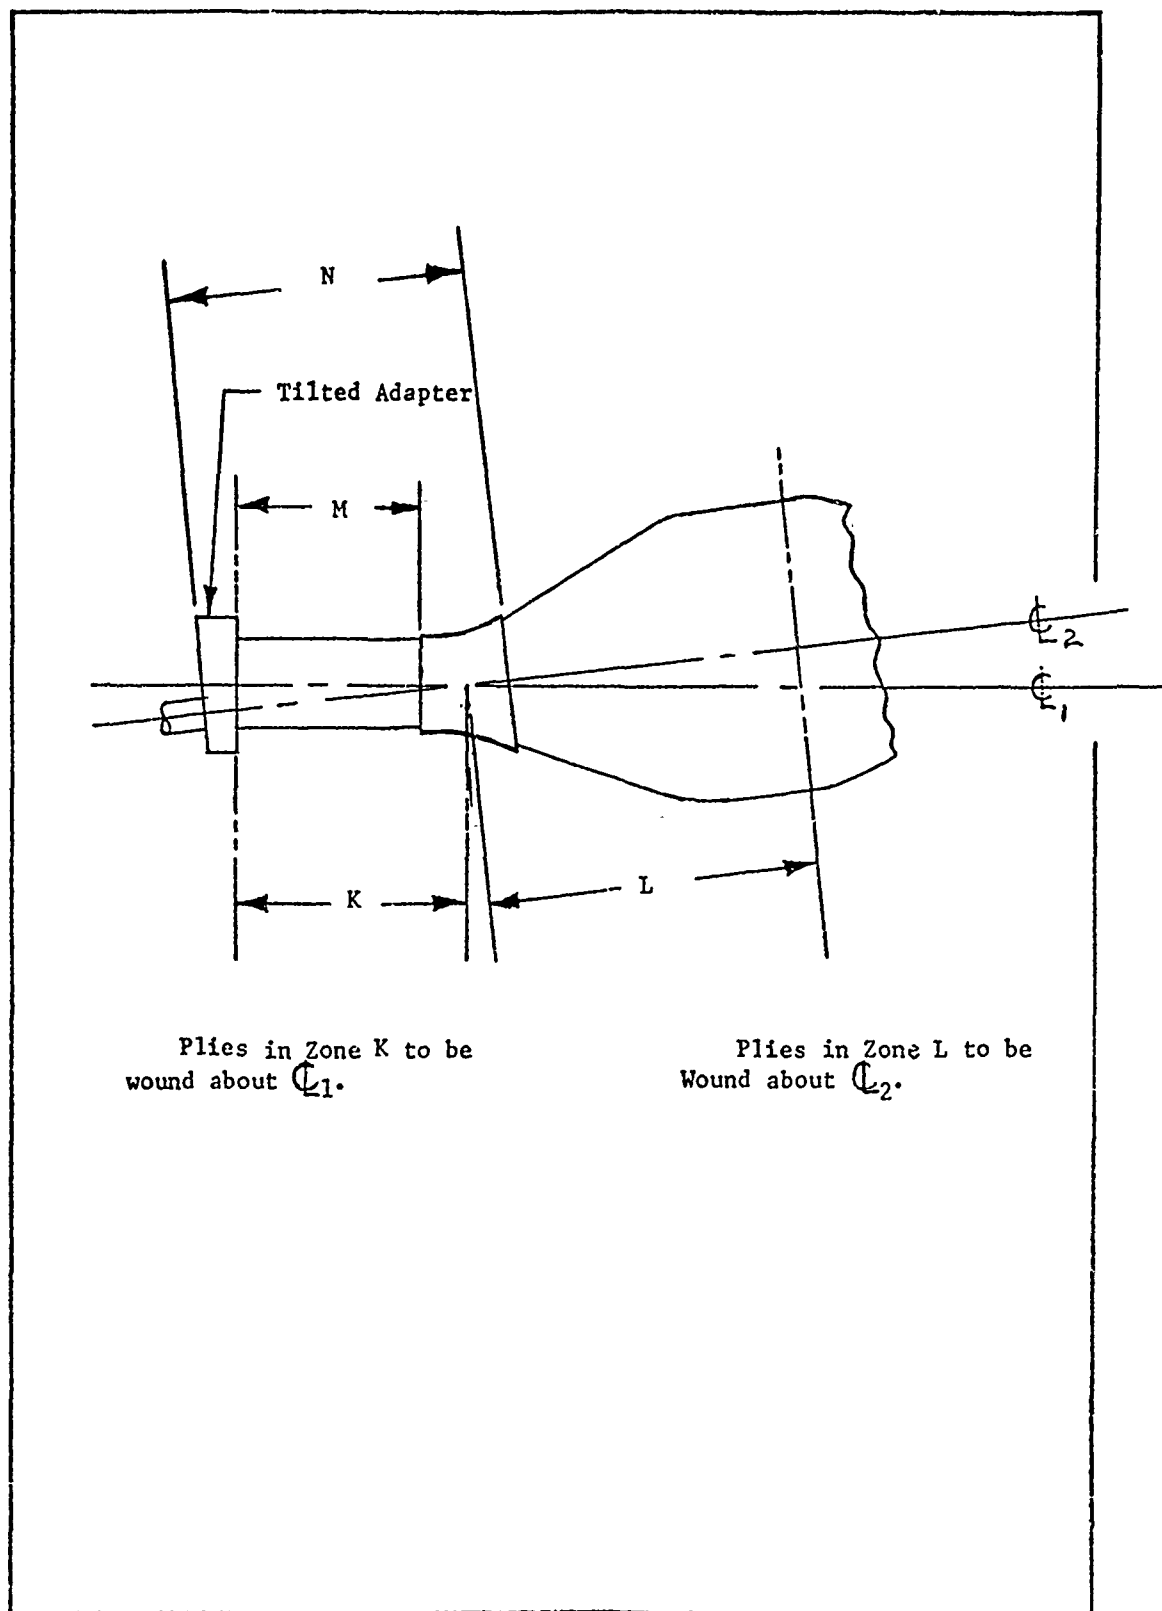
Trunnion Layup Detail for Reinforcement Plies
